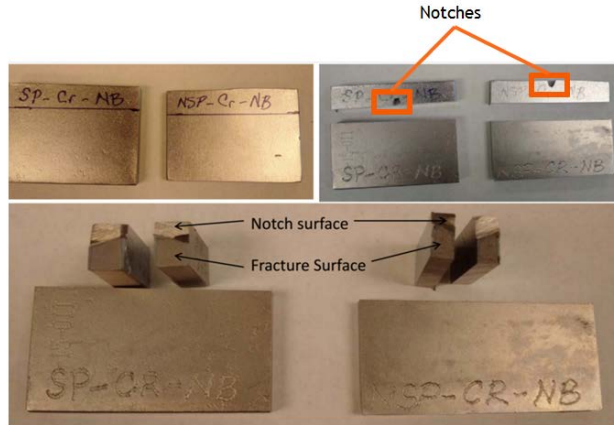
This image shows the flat panel specimens that were cut out into the lab fracture samples, the notches, and the final sample surfaces. The samples used for the lab fractures had dimensions of roughly 1.5 in. x 0.5 in. x 0.25 in.
